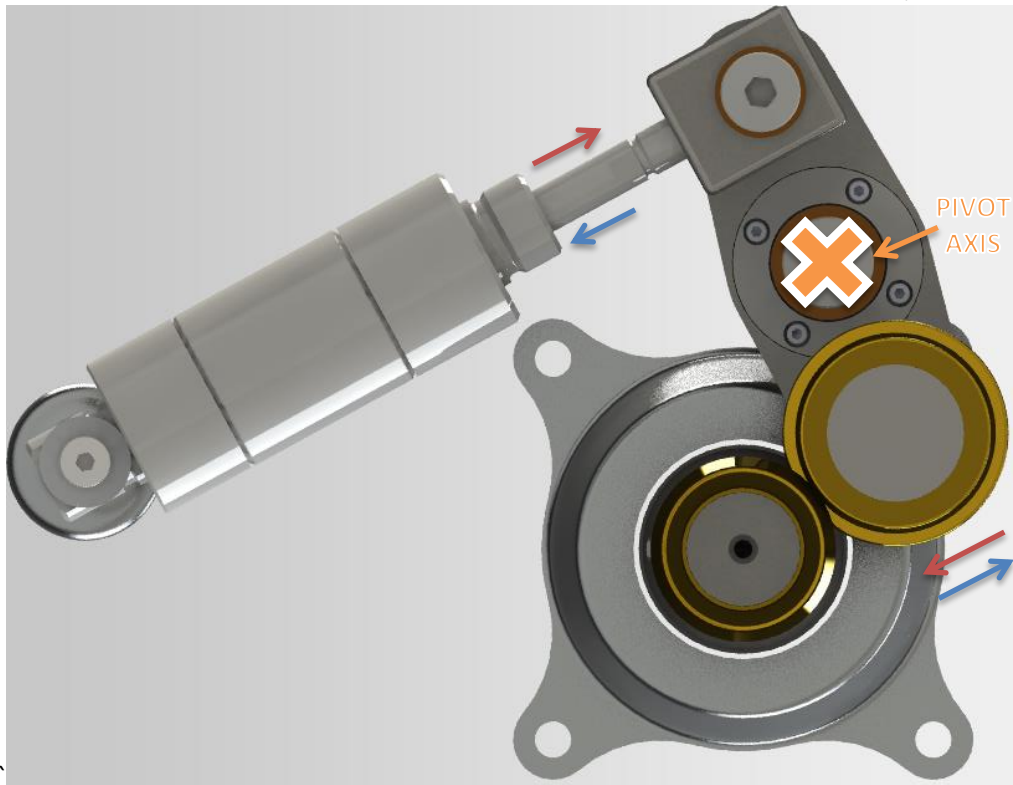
Chuck and roller assembly. Extending cylinder (red arrow) will extend the roller into the chuck. You may thread the cylinder shaft into the female block to get a shorter cylinder stroke and bigger gap between chuck and roller.
